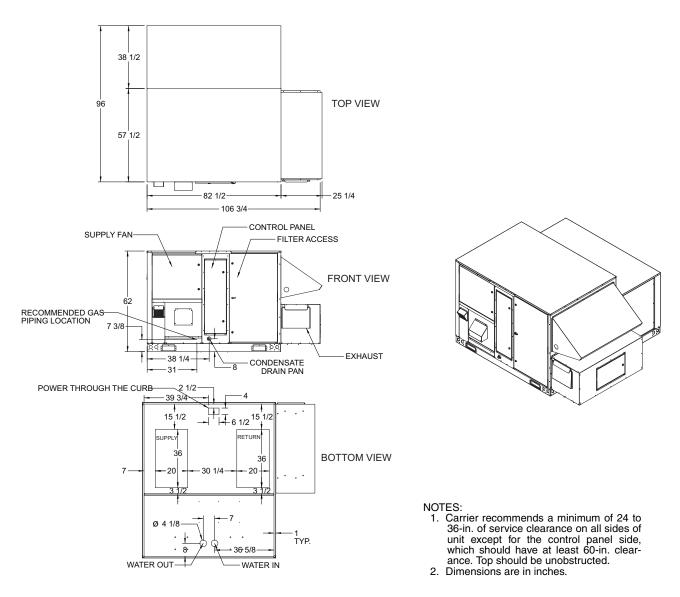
Unit Dimensions — 62RC,RD07-09 Units with Optional Exhaust
